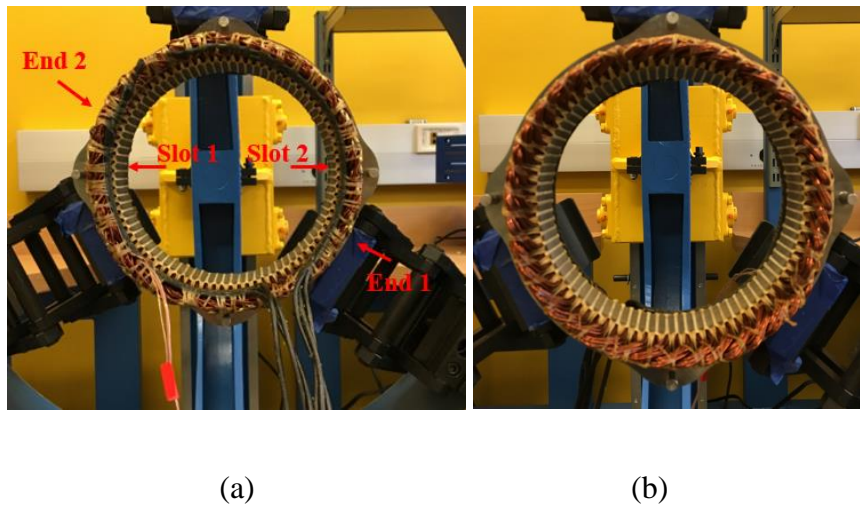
Stator Assembly: (a) Front Side (b) Back Side
